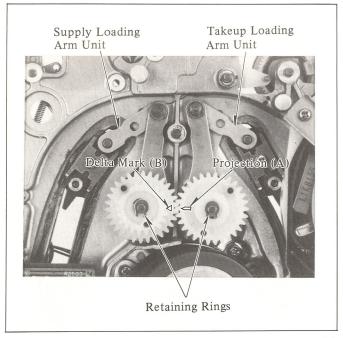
Assembly and Adjustment of Gears and Rods-(1)
